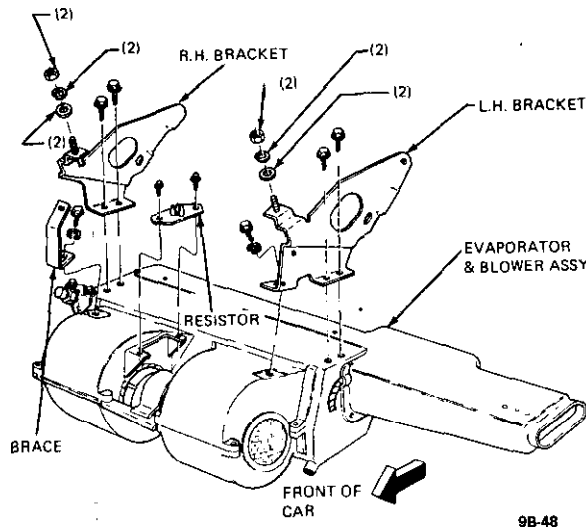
B-67 Evaporator and Blower Assembly Brackets and Attachments • Opel 1900 • Manta
